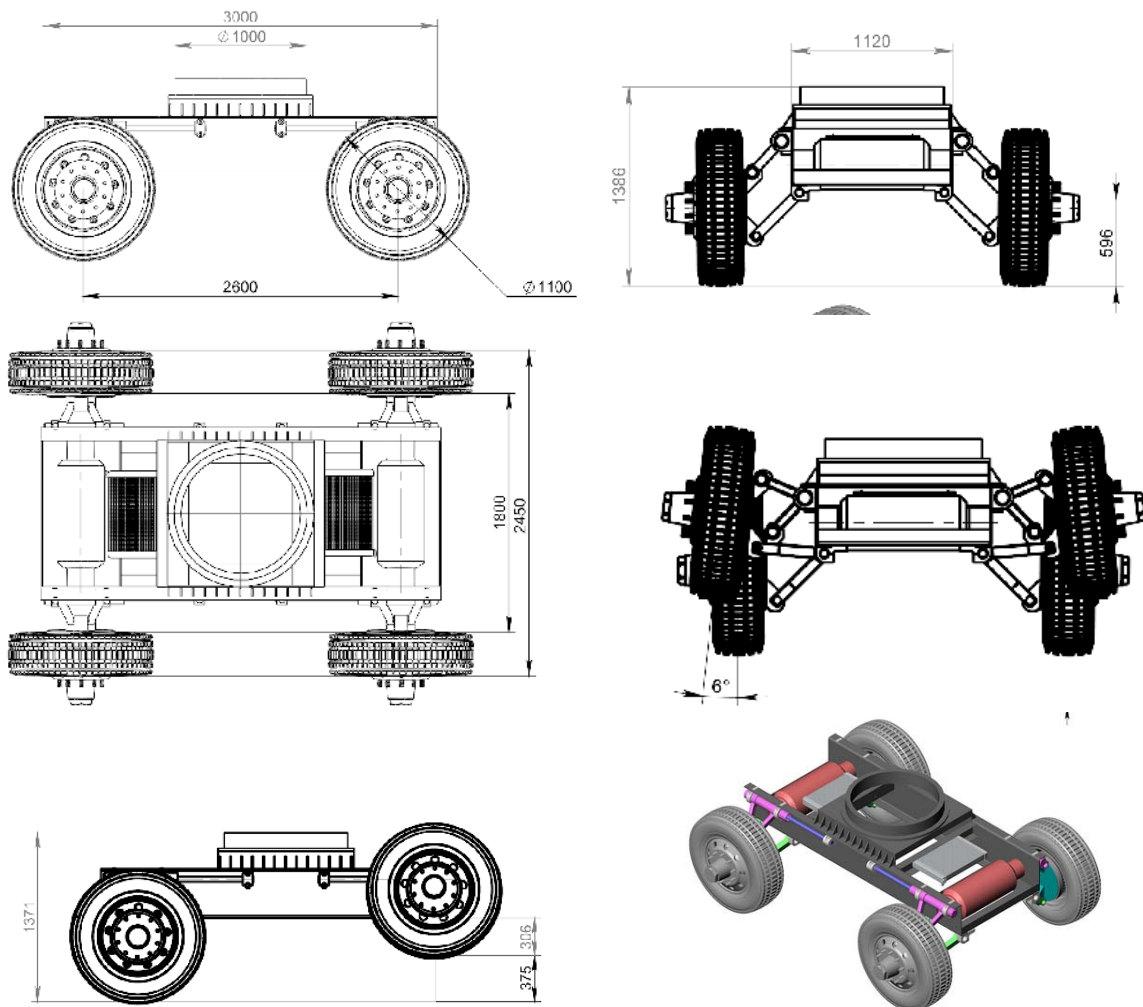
Overall and geometric dimensions of wheel movement in an independent torsion suspension system of the wheels swivel bogies
